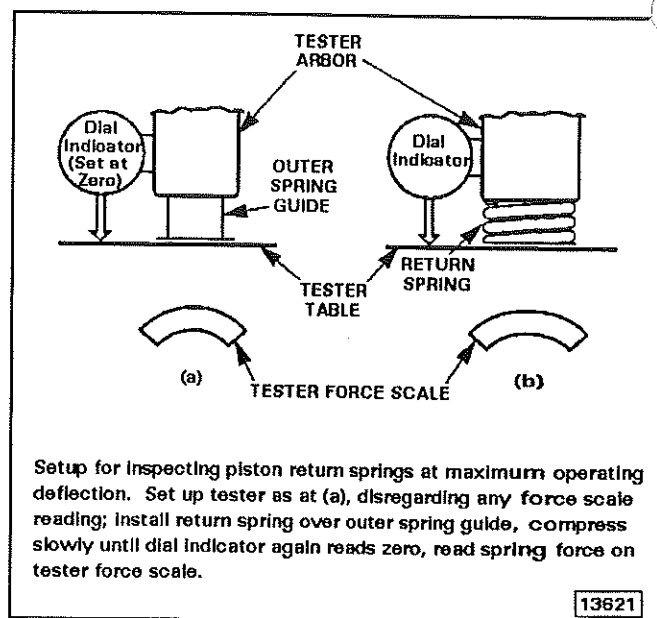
INSPECTING PISTON RETURN SPRING
